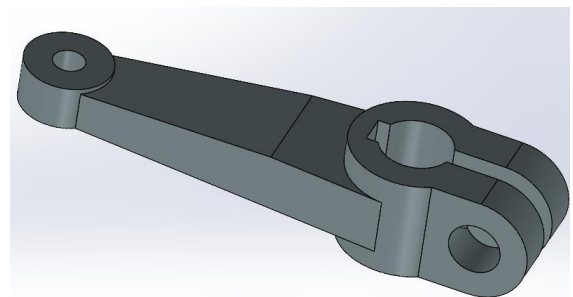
Three-dimensional CAD model of the mechanical linkage arm.
